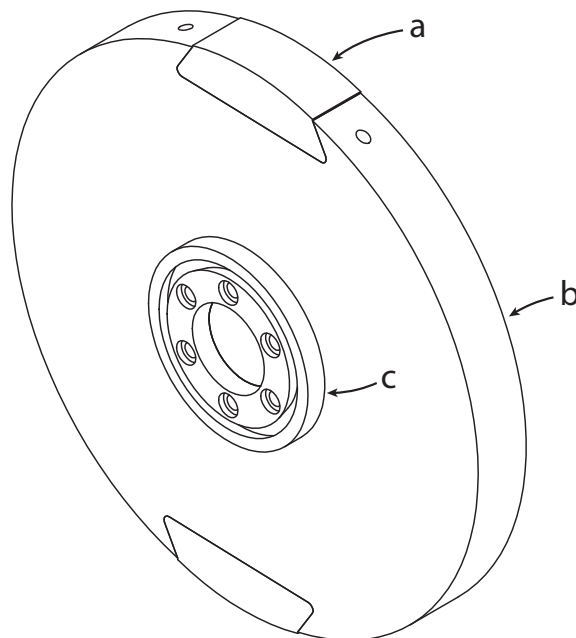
Disc assembly with main components: (a) Sample; (b) Disc; (c) Balancing system.
